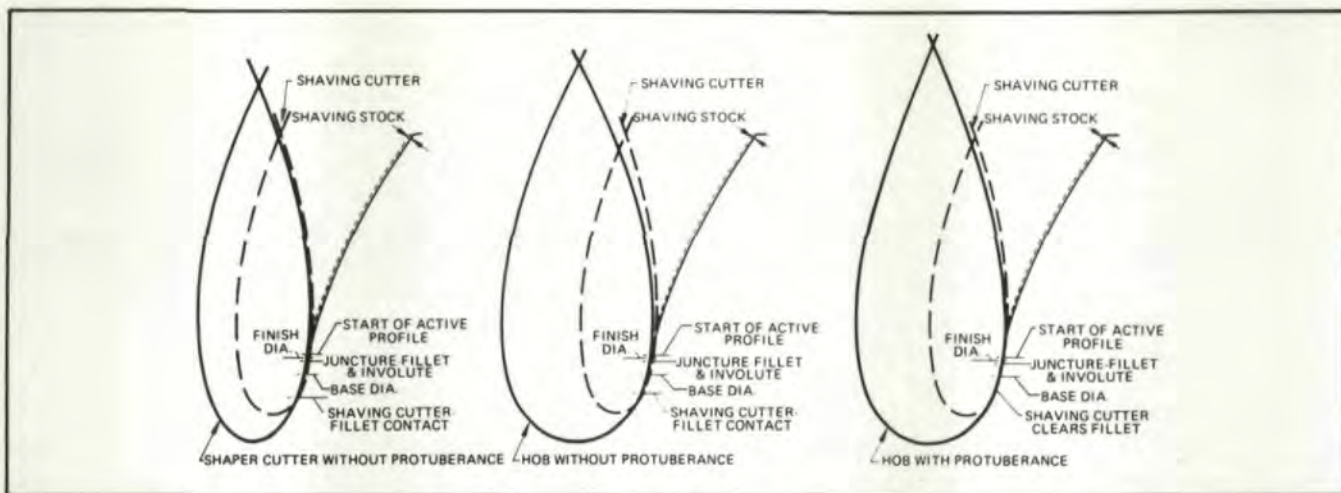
Generating paths of shaper cutter, hobs and rotary-shaving cutters in fillet area on same tooth.
